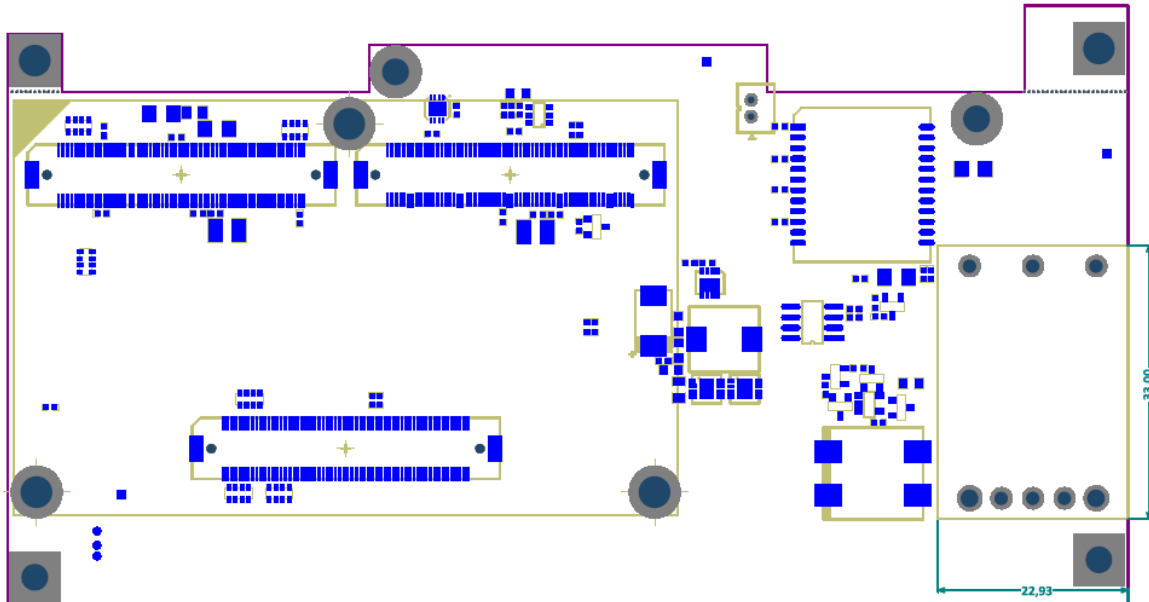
Bottom View of the Sentis3D-M530-Baseboard
